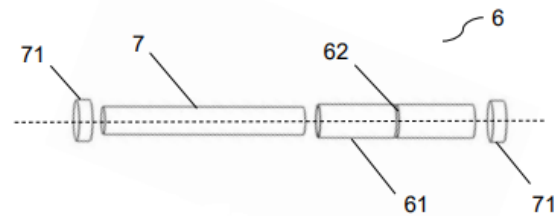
An exemplary exploded view of the scrapper wheel.
